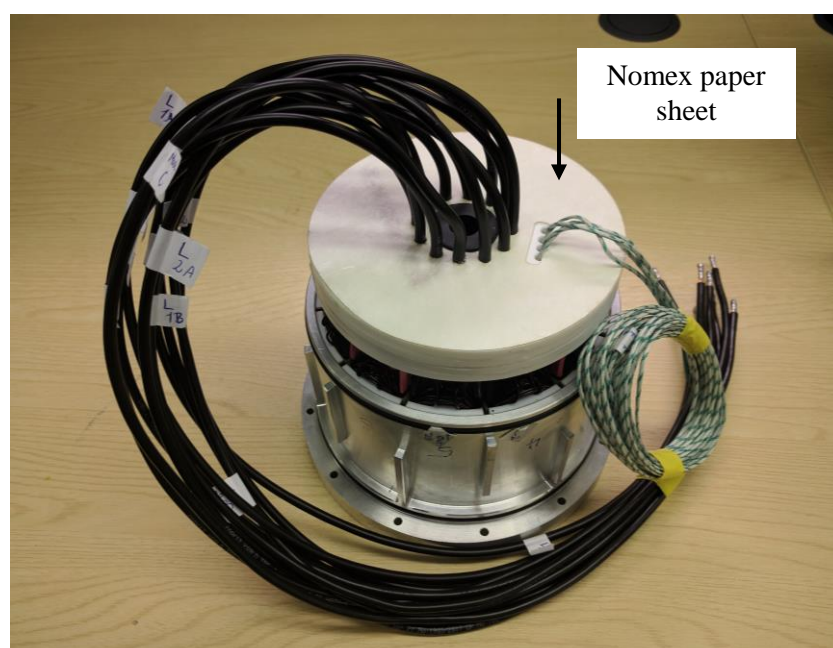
Board 4: process of assembly with a single busbar in the last board
